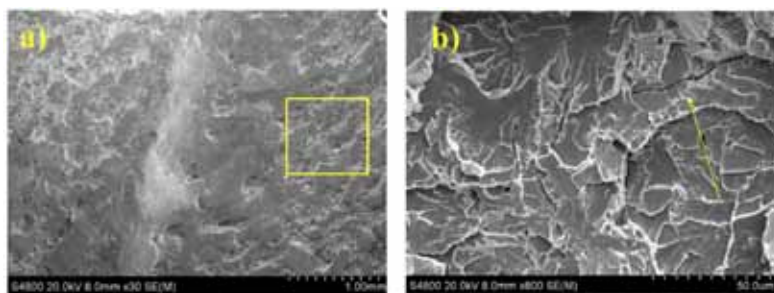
SEM fractography - bottom fracture surface: a) initiation site showing protrusion; b) magnified view of initiation site showing secondary cracking
